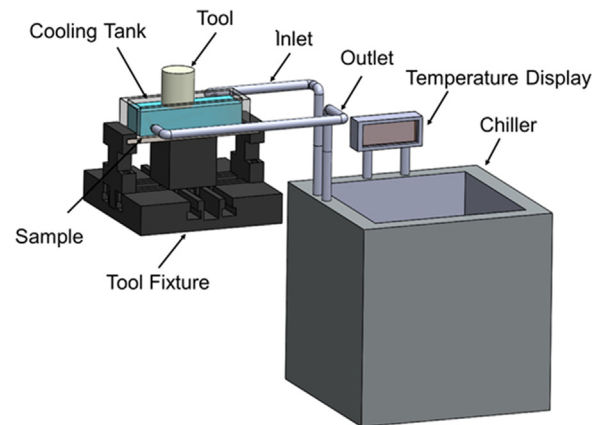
Schematic of friction stir processing (FSP) set-up used in the current study. A specially designed tool-fixture was used to clamp the work-piece of variable dimensions. The fixture has a cooling tank located above the work-piece which is connected to the external chiller unit through inlet and outlet ports. The coolant used in the chiller was mixture of distilled water and ethanol.
